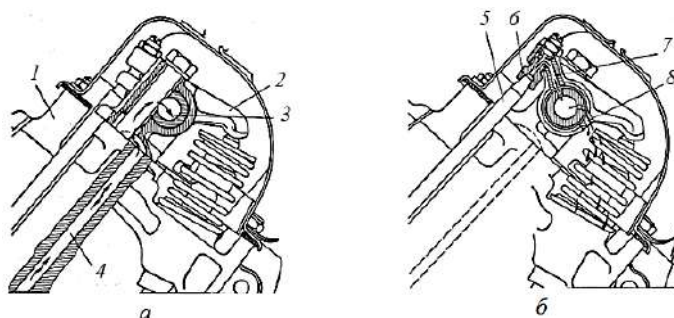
Rocker arm mechanism lubrication scheme: *a*– oil supply scheme to the rocker arm axis; *b*– lubrication scheme rocker mechanism; 1– cylinder head; 2– rocker arm; 3– rocker arm axis cavity; 4– channel in the cylinder head; 5– barbell; 6– adjusting screw; 7– channel for supplying oil to the friction pair adjusting screw – rod; 8– channel for draining oil from the axle rocker arm
